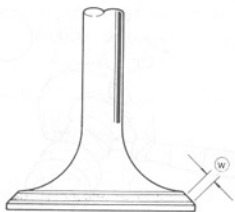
Contact pattern $\text{\textcircled{W}}$ uniform in width
